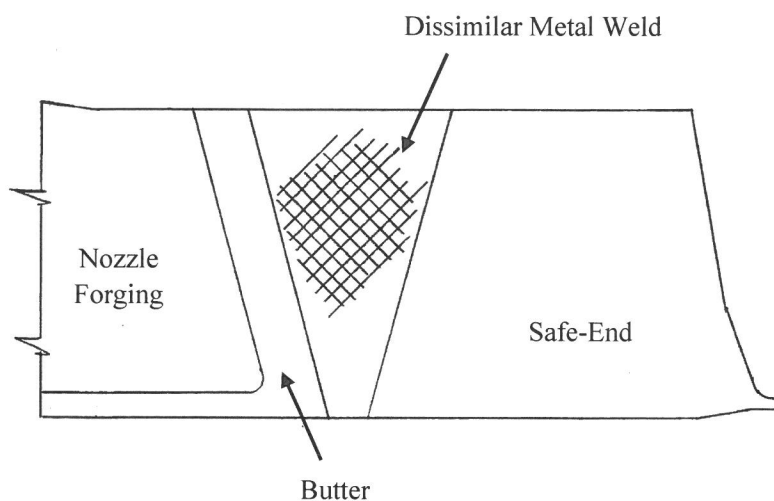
Beaver Valley Unit 2 Reactor Vessel Inlet Nozzle DM Weld Configuration
